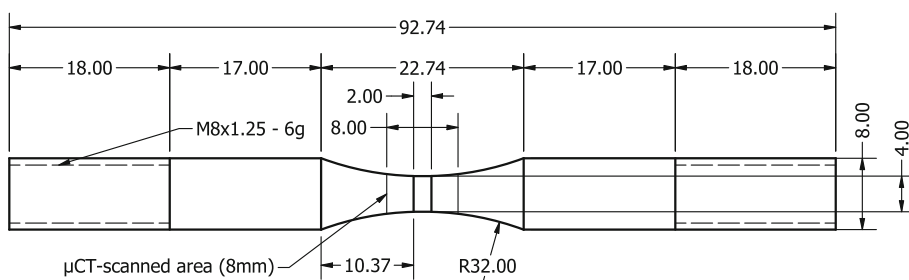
Fatigue specimen geometry with dimensions in mm according to ASTM E466 - 2021.
